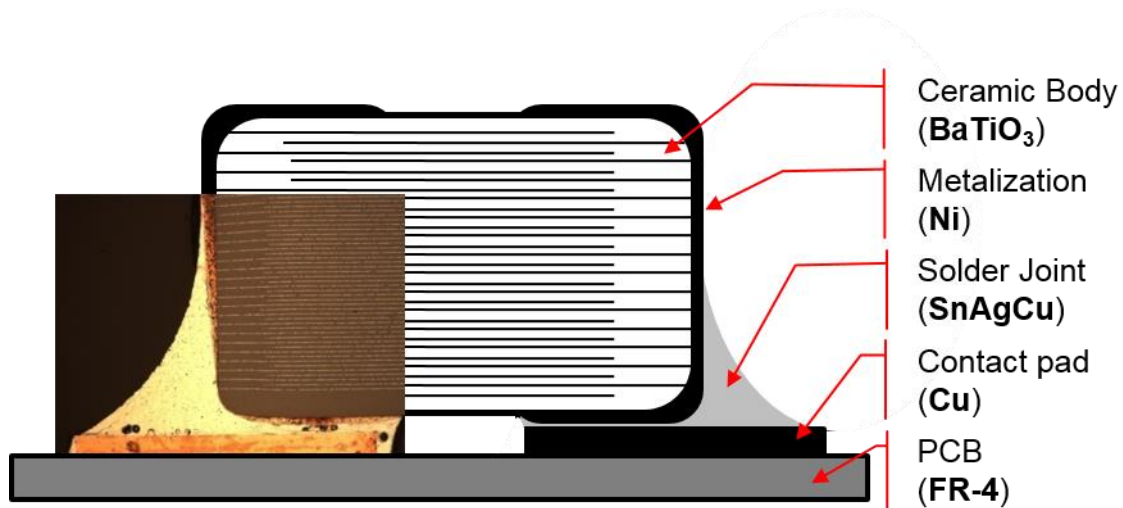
Schematically illustration of the capacitor soldered on PCB.
